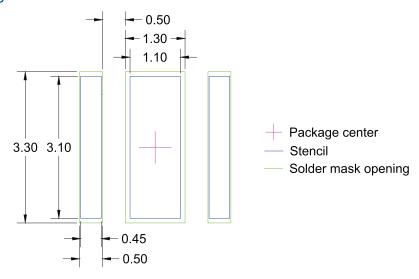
Recommended PCB solder pad layout for LUXEON HL4X
